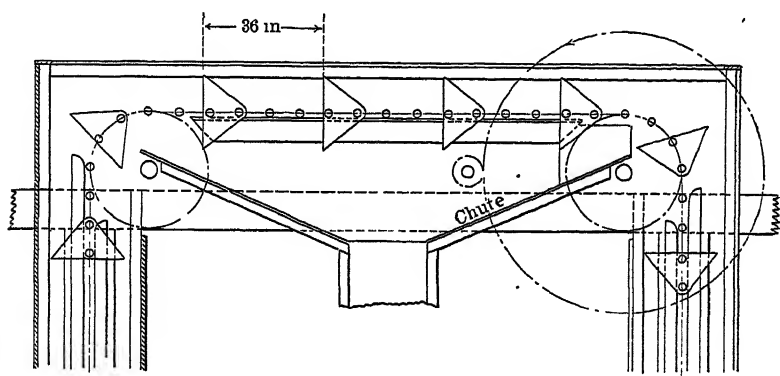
SIDE-ELEVATION, SHOWING DOUBLE-STRAND GRAVITY-DISCHARGE ELEVATOR.
